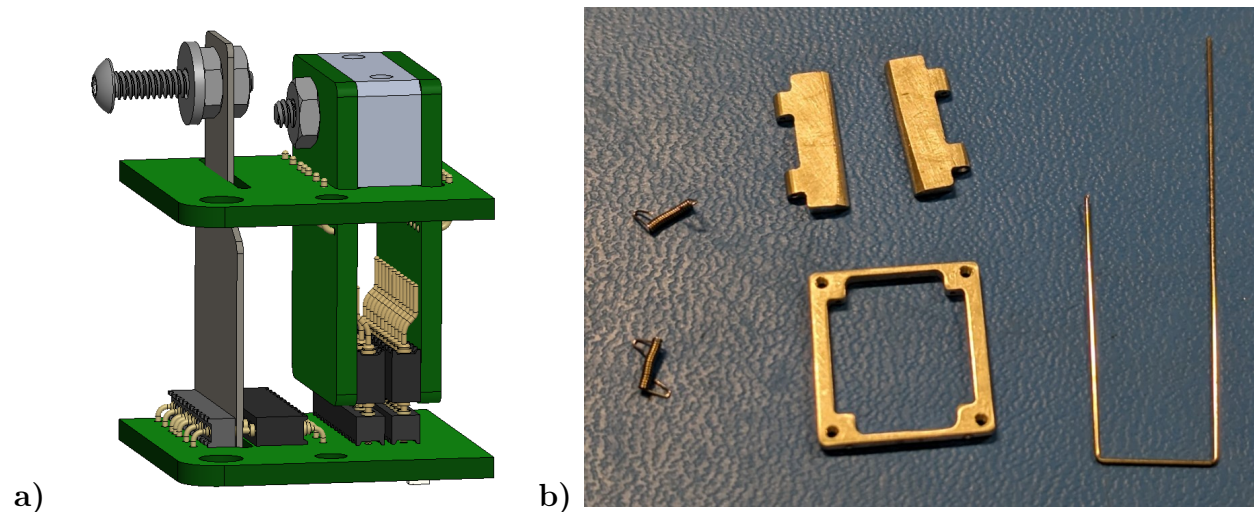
Details of the interstage system and shield door. a) The interrupter sheet and connector besides the daughterboards with the interstage connector. b) Parts prepared for shield door assembly.
